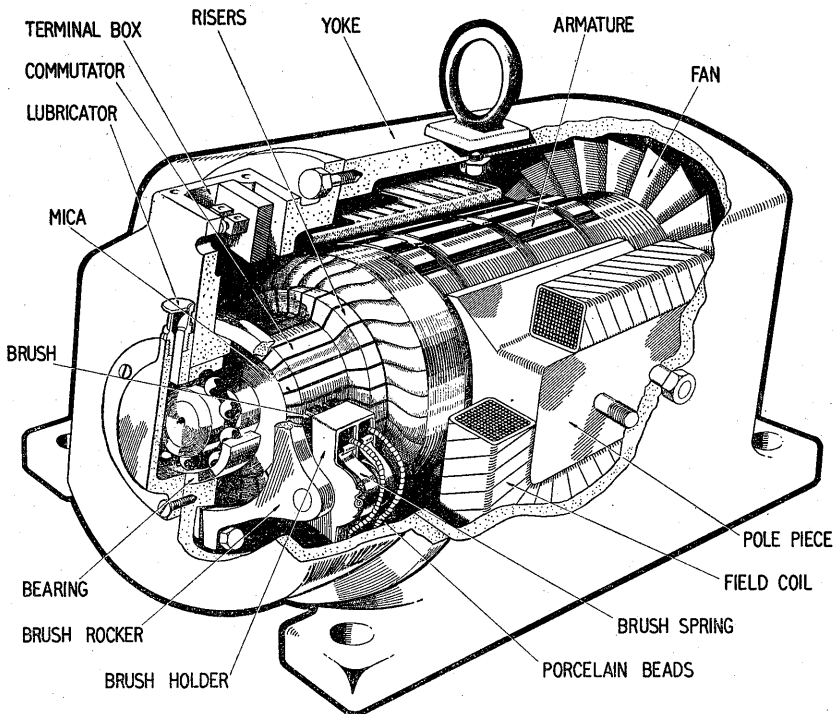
CONSTRUCTION OF A TYPICAL D.C. MACHINE
